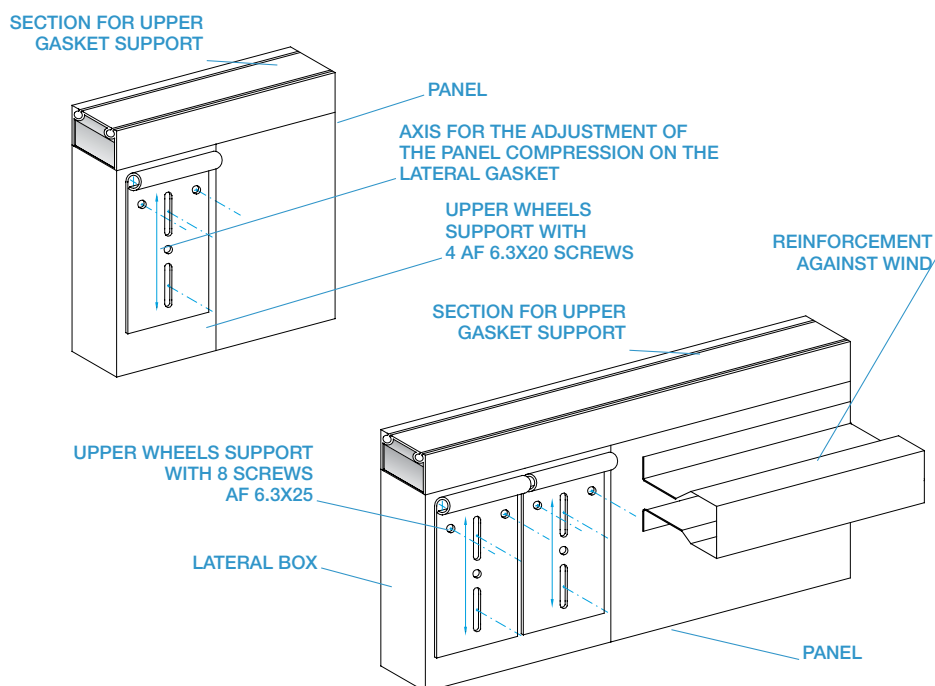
WHEELS SUPPORT ASSEMBLY - ALL TYPES
